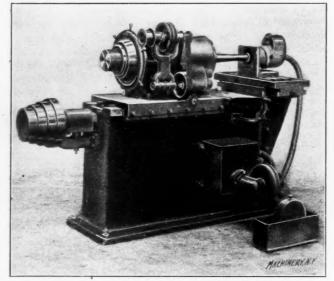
Rear View of Small Size Internal Grinding Machine, showing Dust Exhausting Arrangement.
